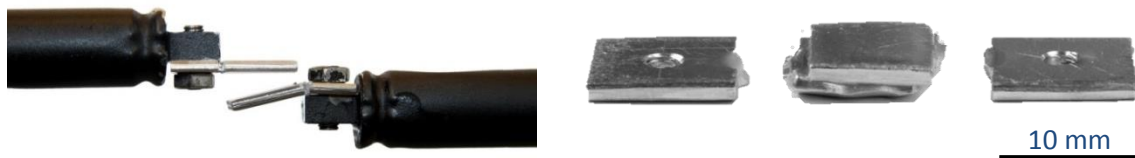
Detailed photograph of two specimens in collision position, the adjusted angle is  $15^\circ$  and the impact surface is  $12 \times 12$  mm each (left). Welded specimens separated from the clamped part (right, [11])
